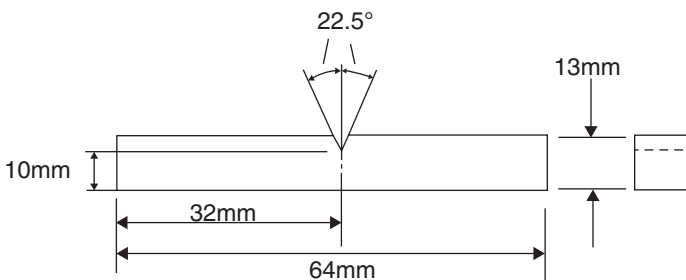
Izod impact test specimen (ASTM: D256)
